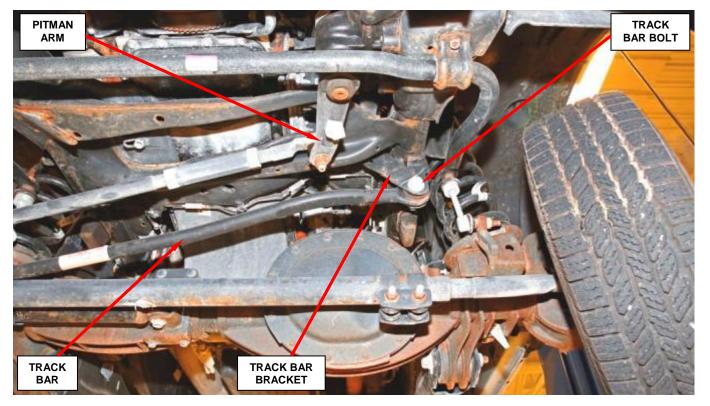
Turn Front Wheels full Right and Remove Track Bar Bolt
